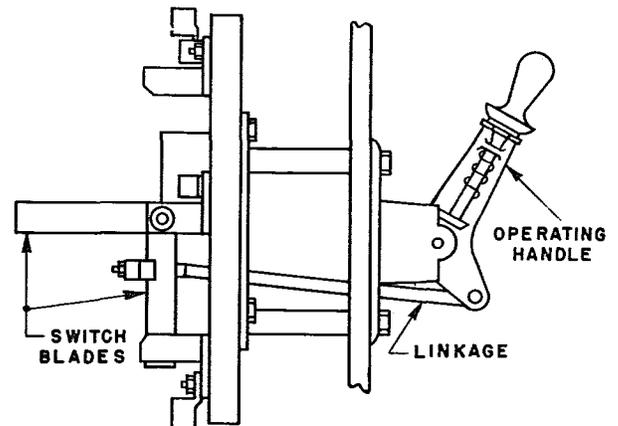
KS-15515, Showing Operating Handle and Linkage to Switch Blades
